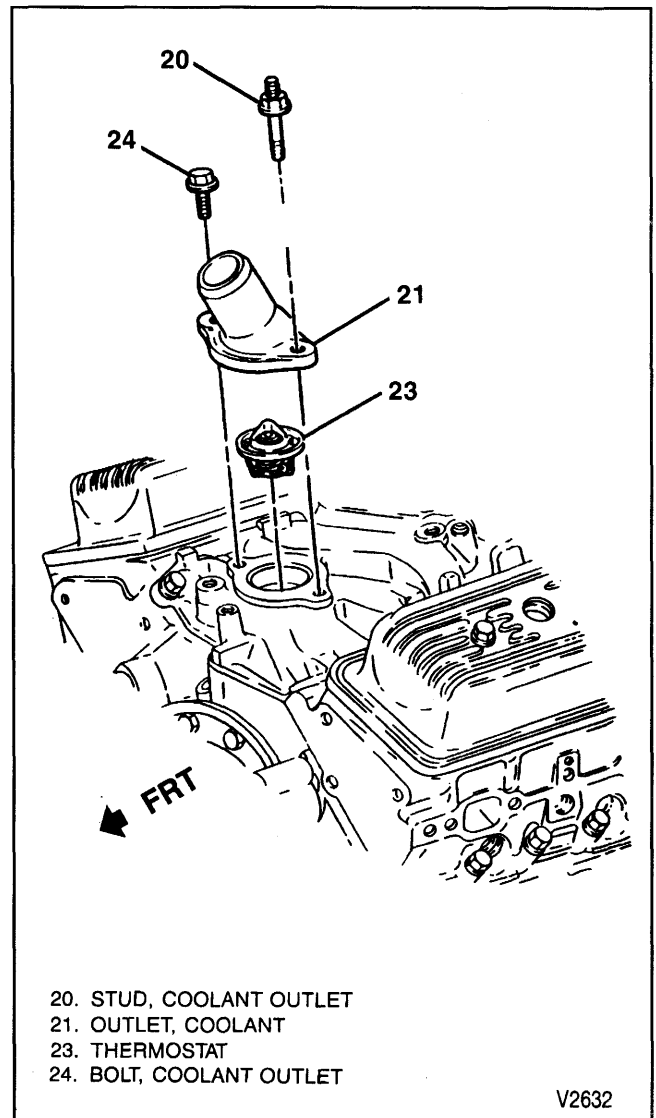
Thermostat and Components (5.0L and 5.7L Engines)
